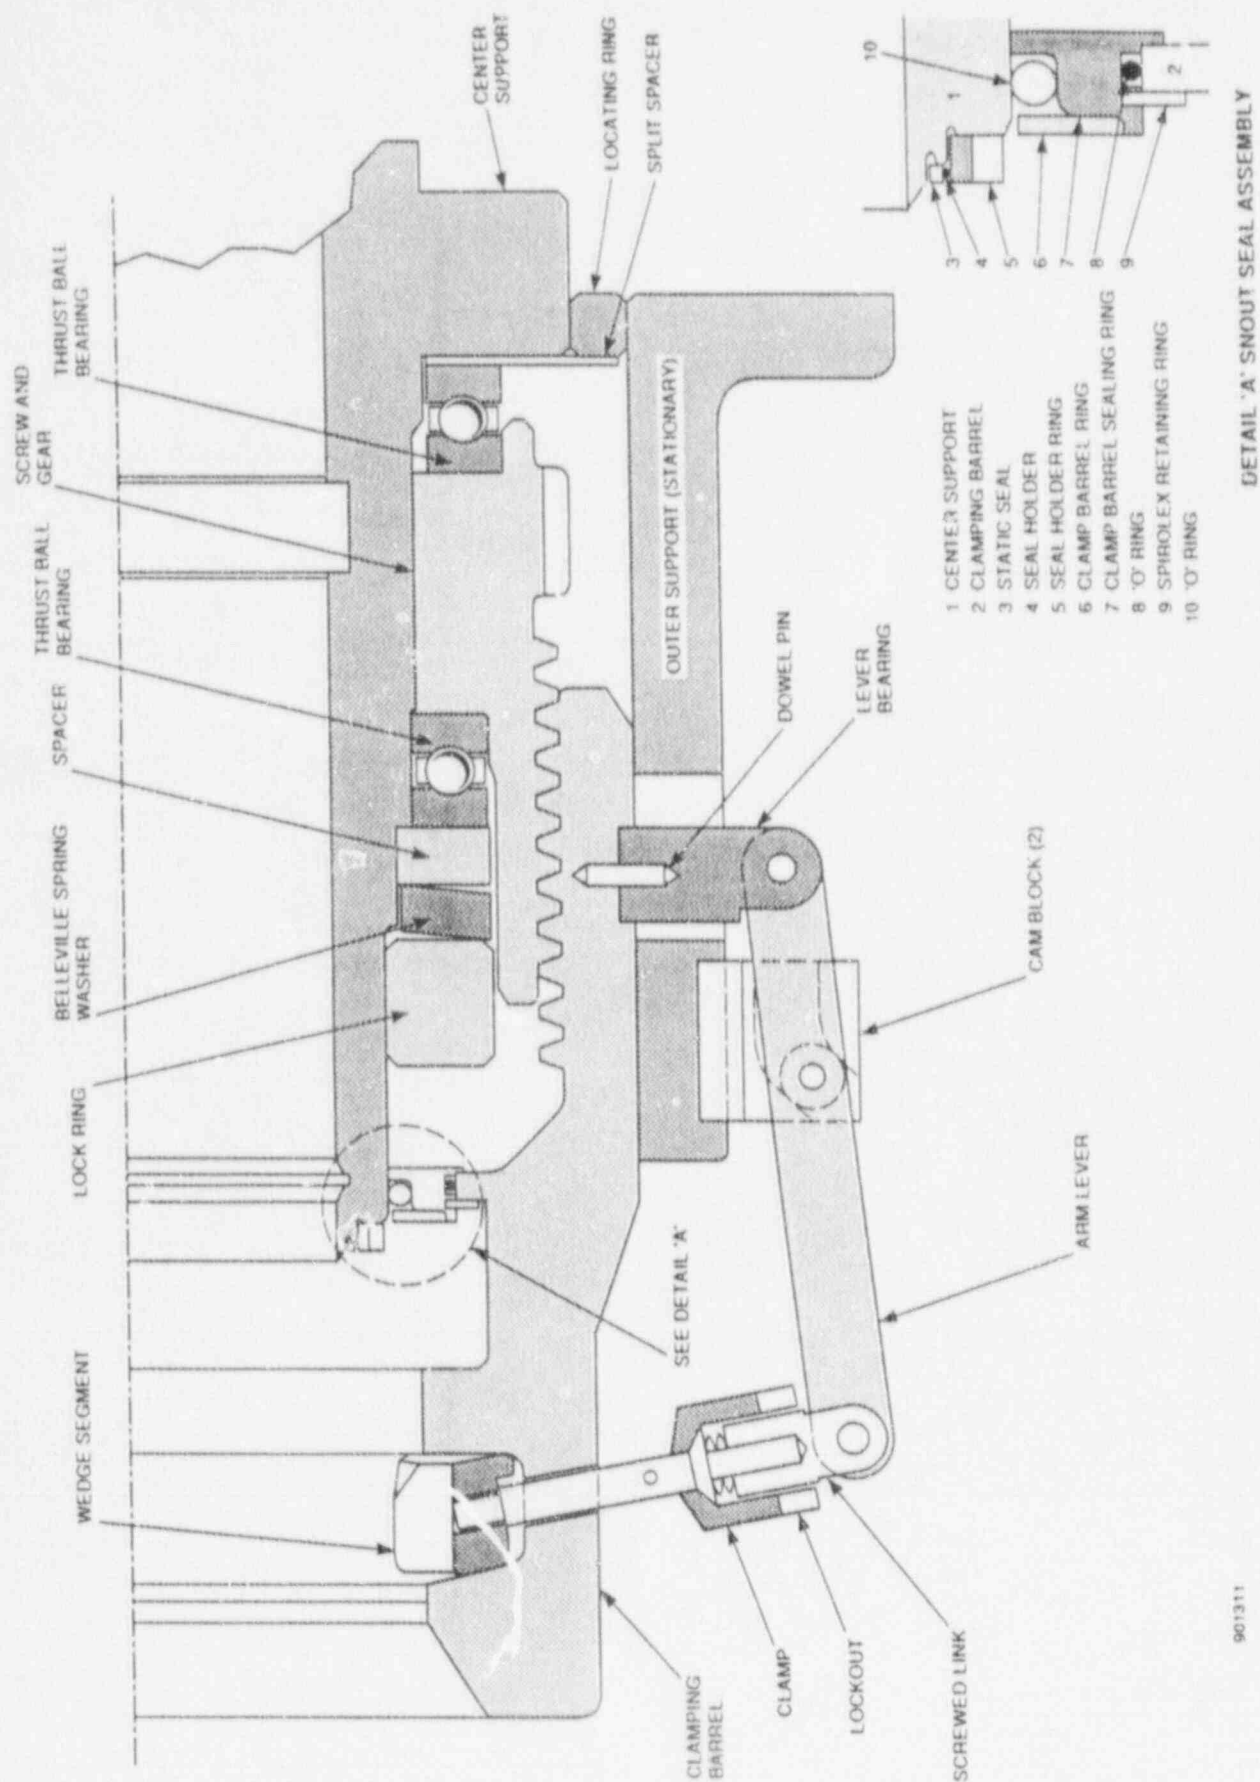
FUELING MACHINE HEAD SNOOT ASSEMBLY (SECTIONAL VIEW)
